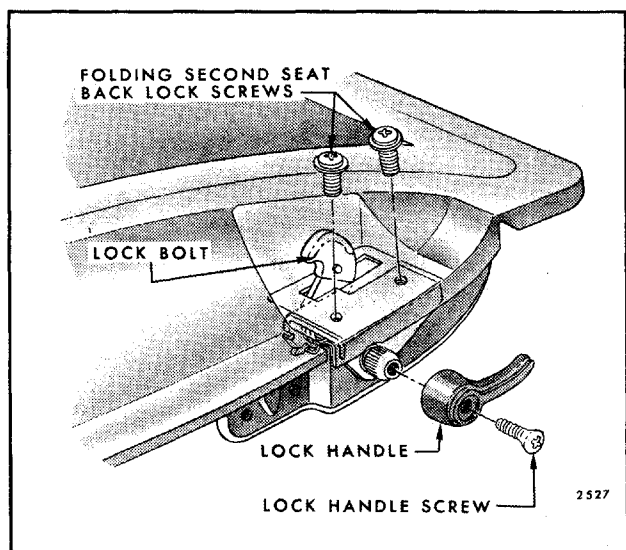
Folding Second Seat Back Lock Installation - All "A" Styles
